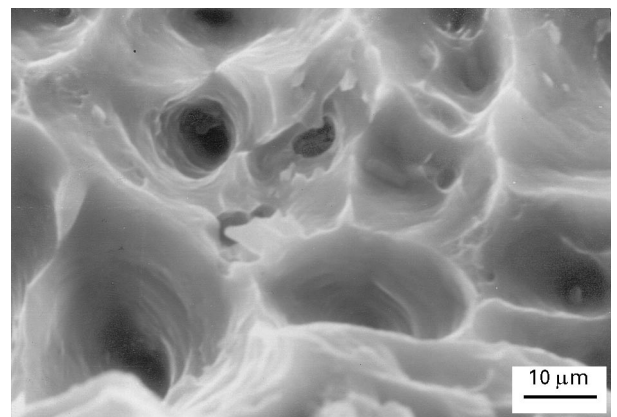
Fracture surface of tensile specimen of 6061 alloy after 2000 cycles up to 220 °C.
